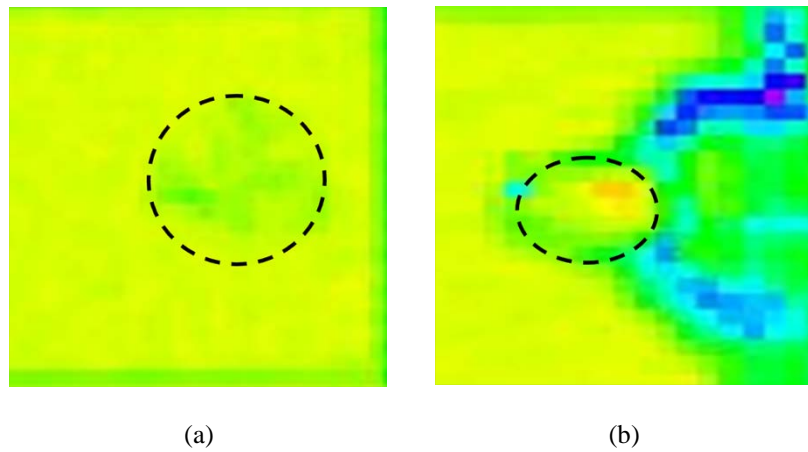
Comparison of damaged area of spot-welded (a) and mechanically fastened (b) joints after DLS tests. The black dashed lines indicate the welded area (a) and deformed fastener hole (b) after DLS tests, respectively.
